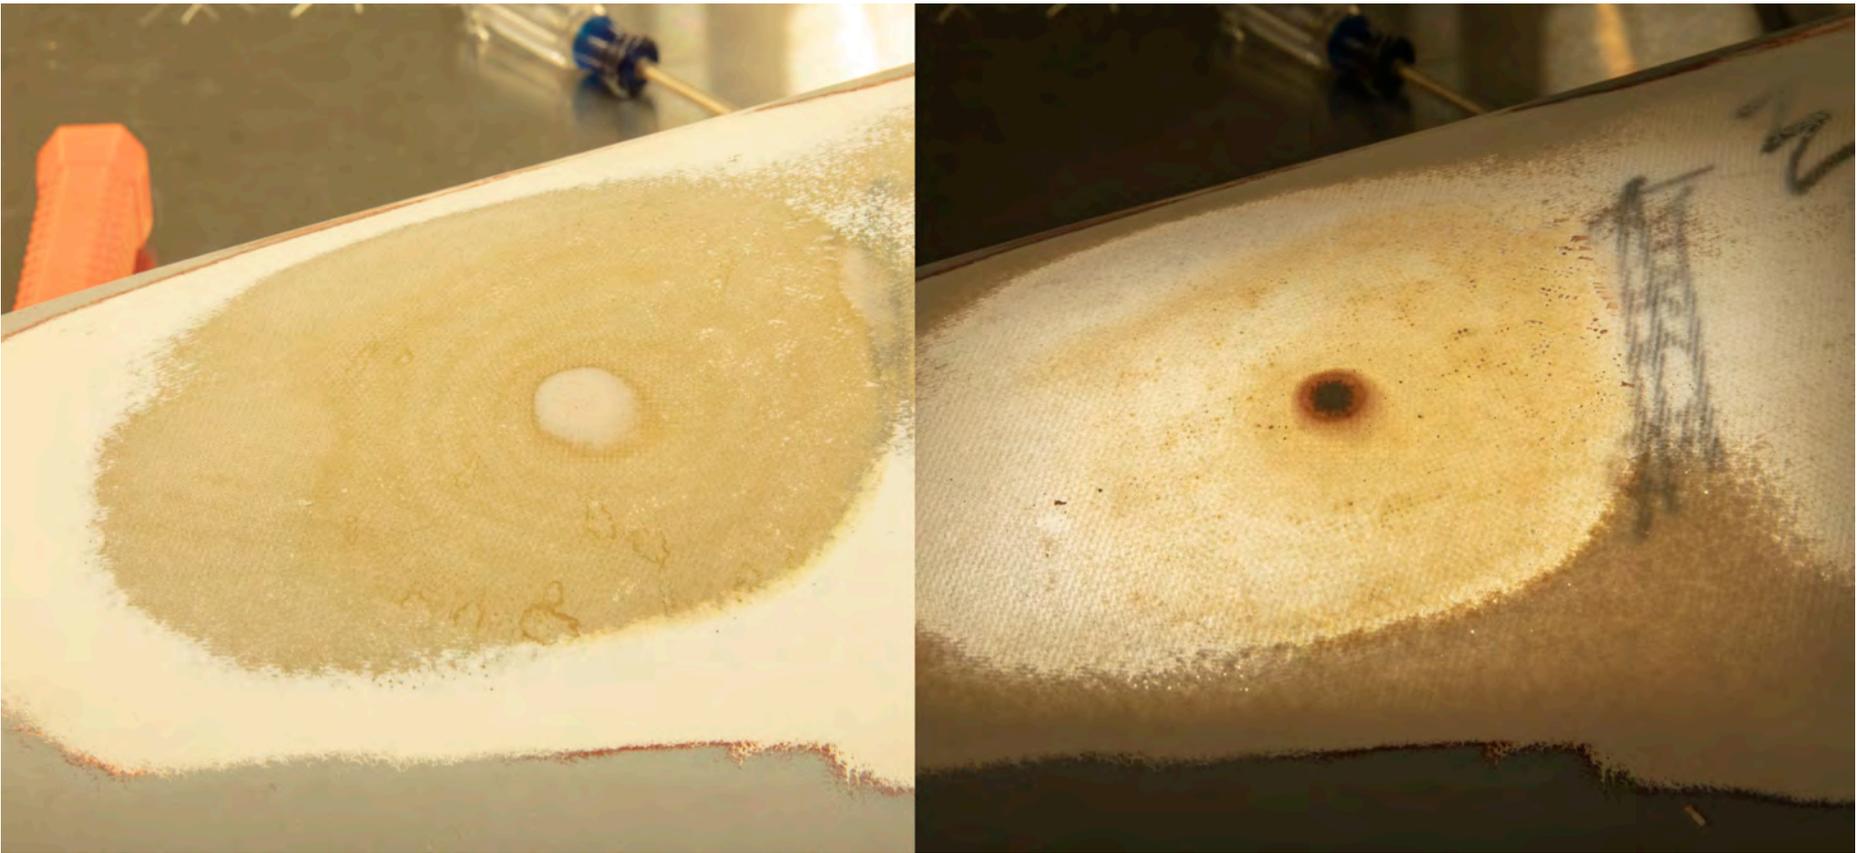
“Back-lit Inspection Method” shows use of excessive body filler
